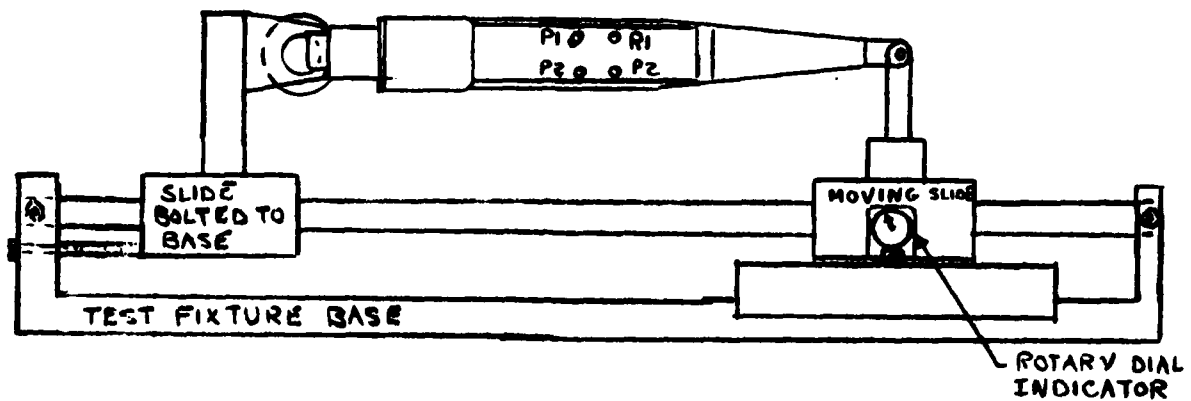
AILERON ACTUATOR NO LOAD TEST FIXTURE
